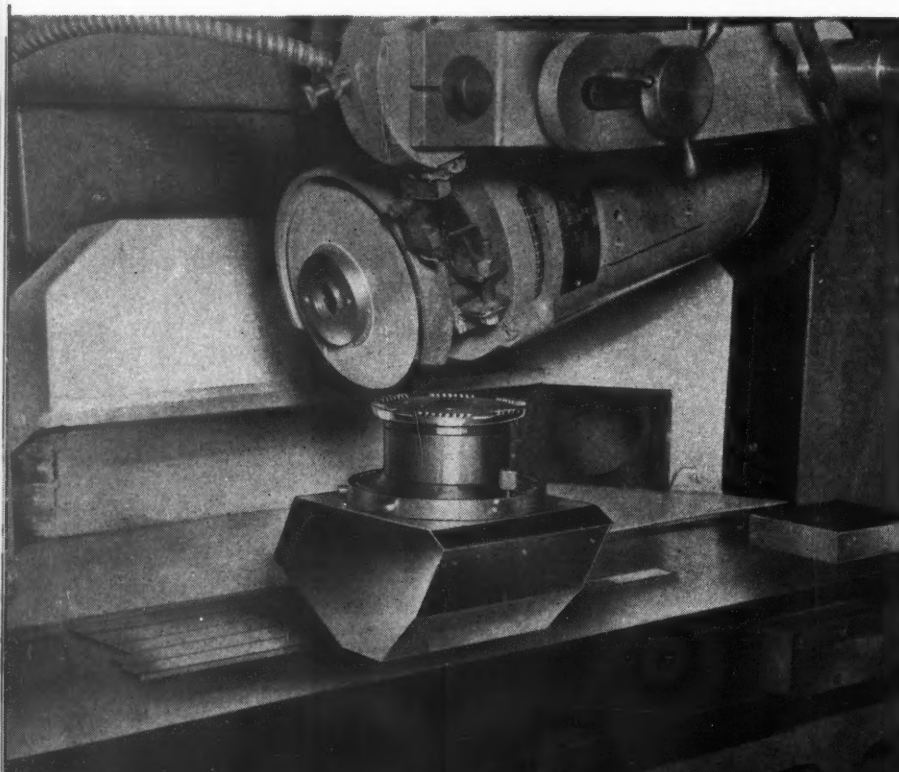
Grinding set-up employed for sharpening teeth of rotary broaches. The base of the indexing fixture has angles on which the fixture rests when grinding various surface angles on broach teeth
